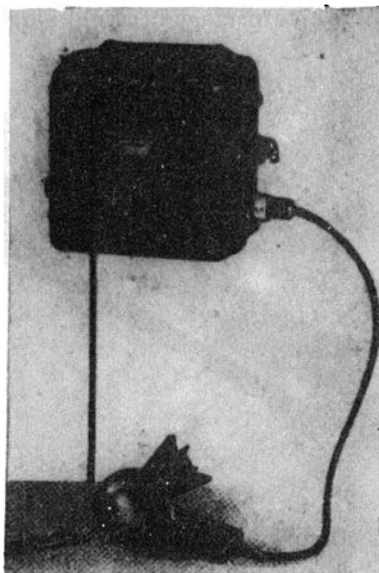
Siemens-Schuckert ultrasonic soldering bit, having cooling fins on the vibrator (connecting bar)
